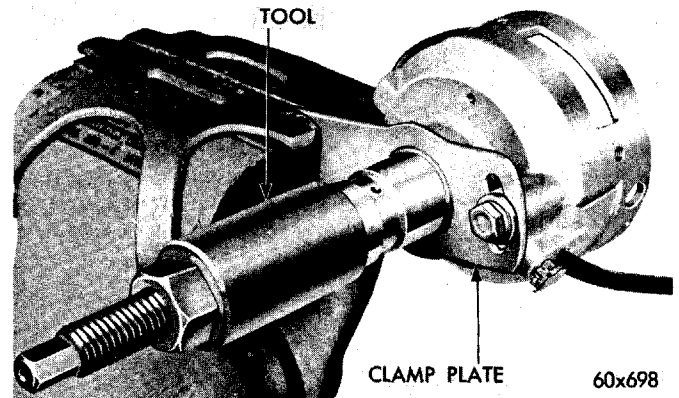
Removing Distributor Housing Lower Bushing (6 Cylinder)
